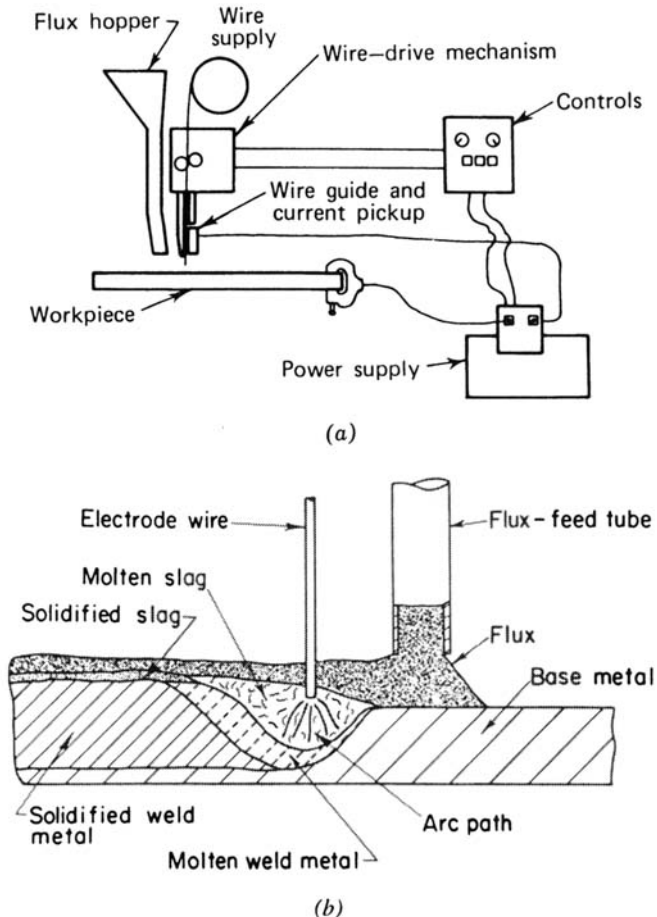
Submerged arc welding. (a) Welding equipment (b) Weld cross section.
